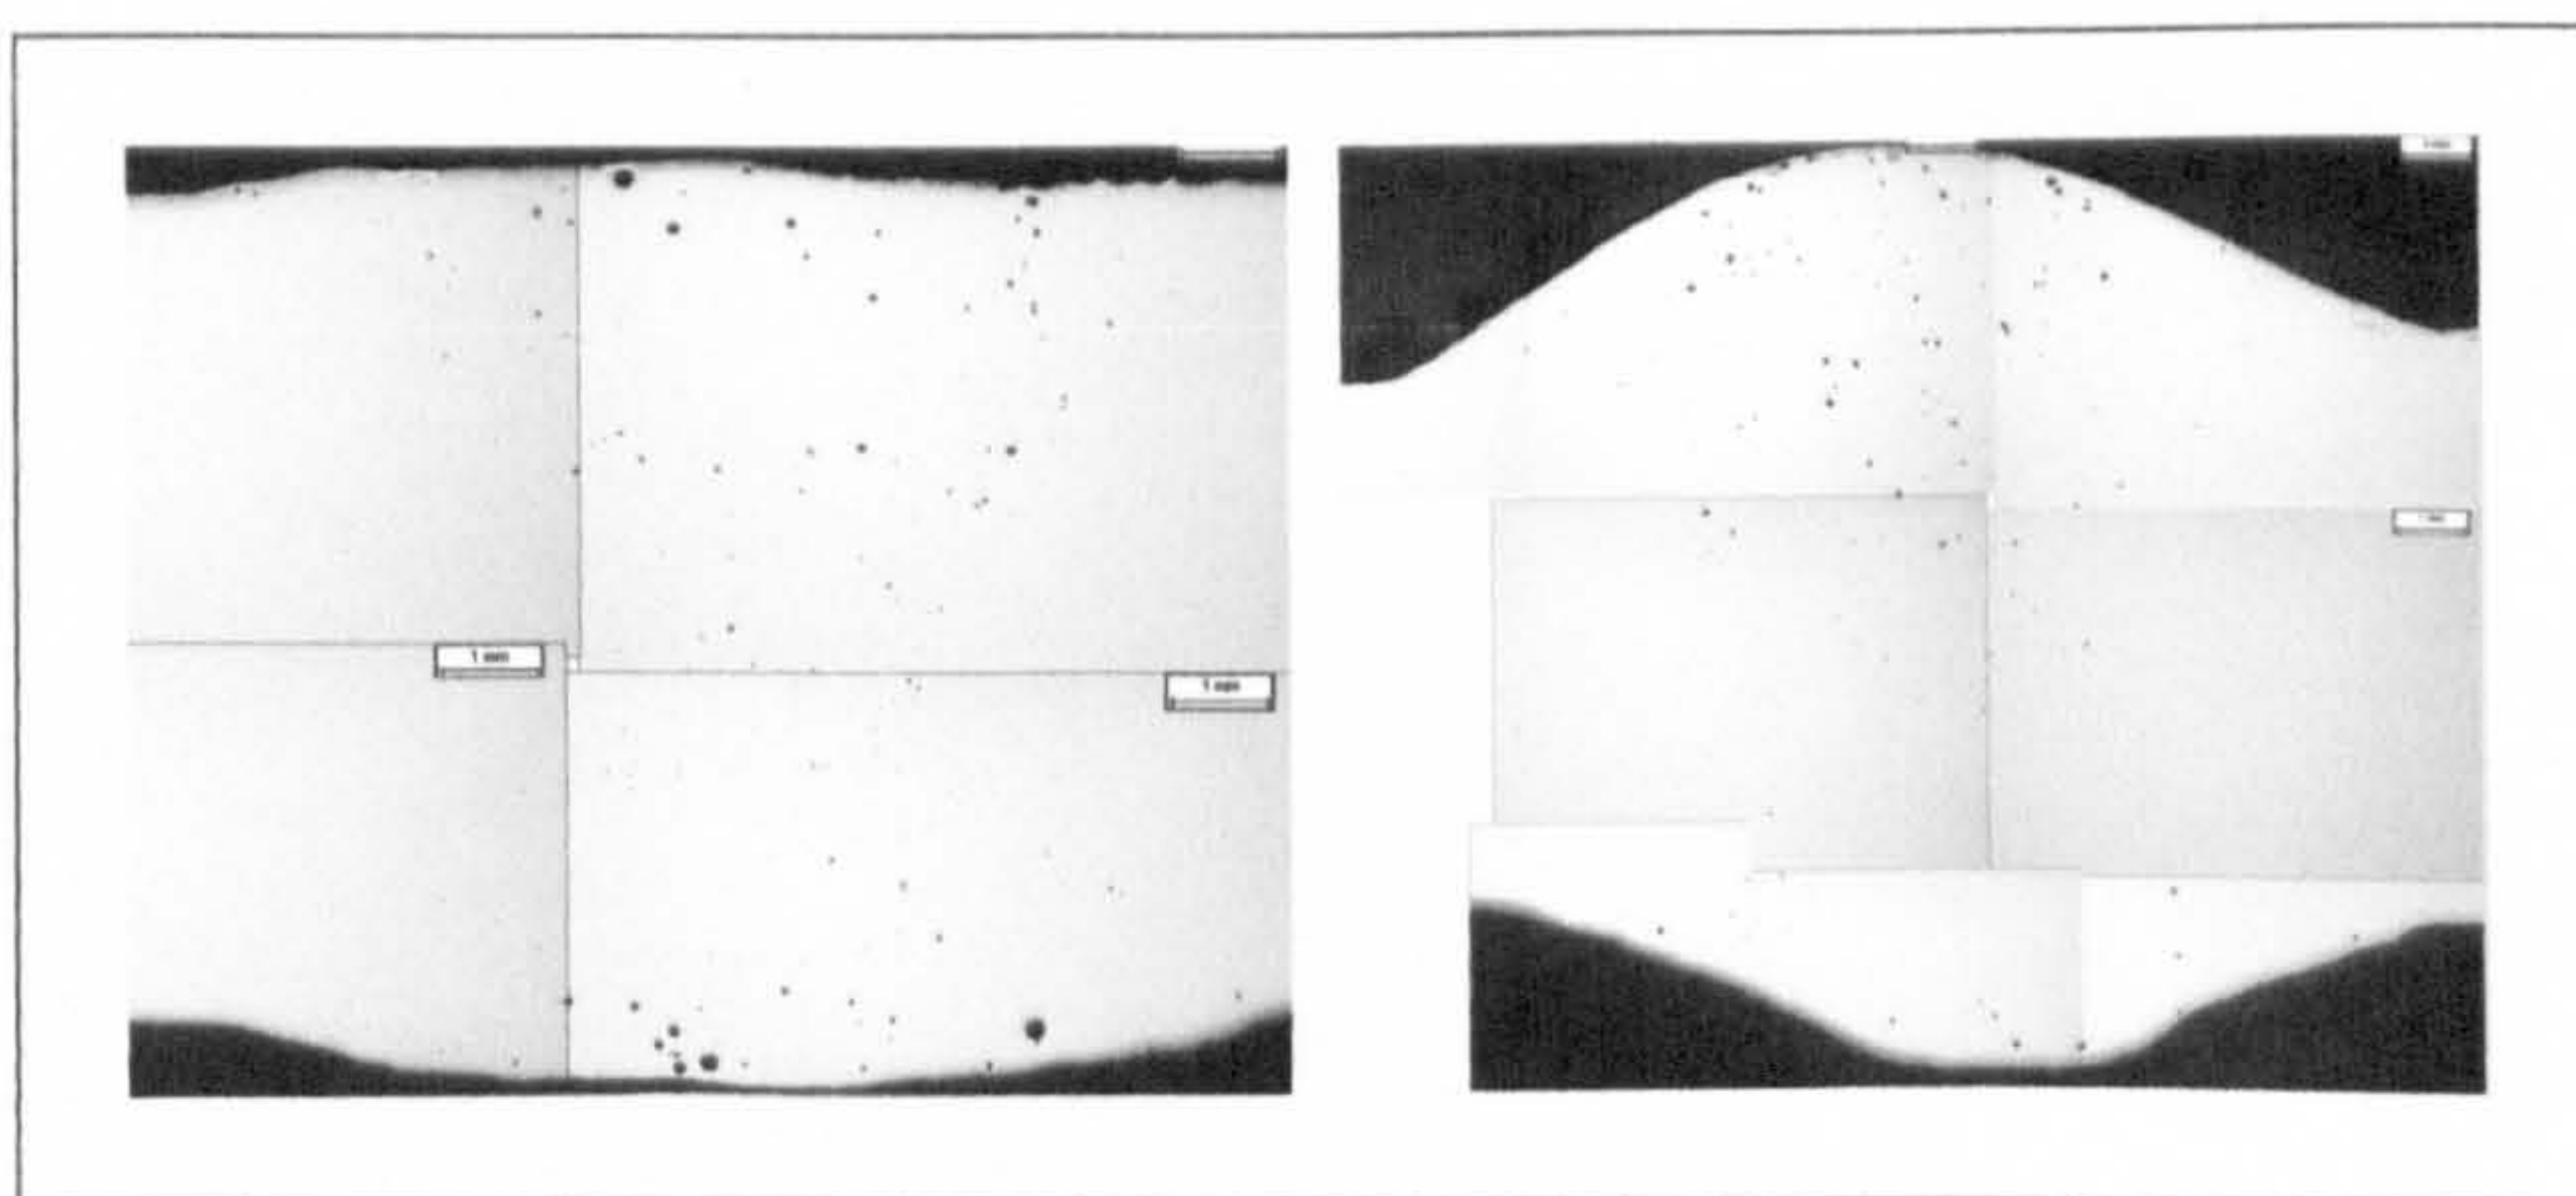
Porosity in MIG weld butt joints in AA 5383-H321, (LI input, left; HI, right).
